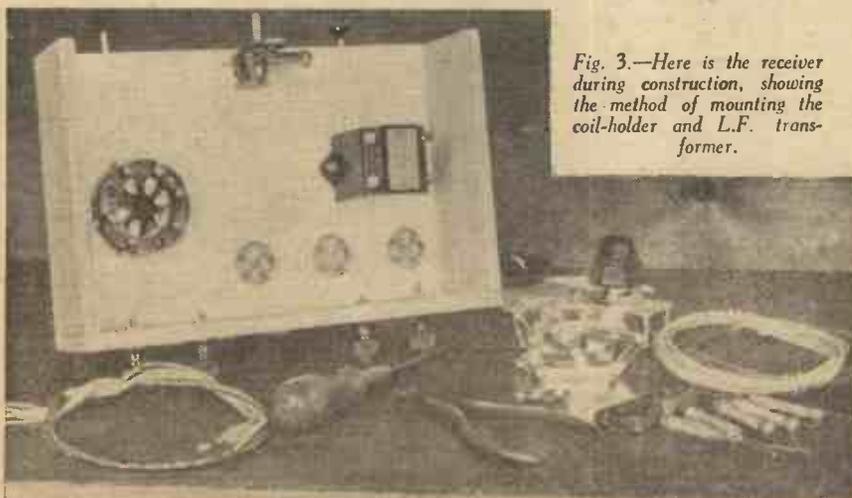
Here is the receiver during construction, showing the method of mounting the coil-holder and L.F. transformer.
